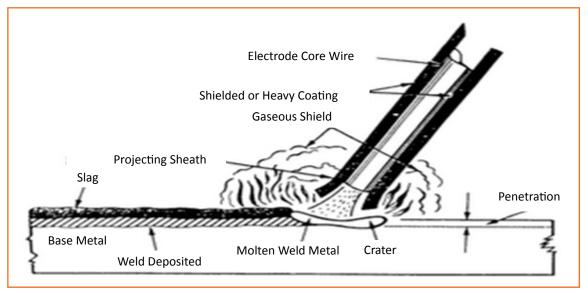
Shielded Metal Arc Welding
